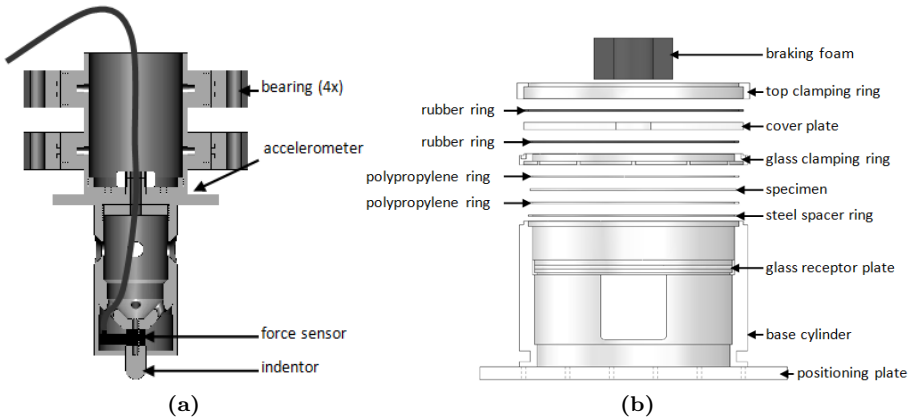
Assembly drawings for drop weight test setup components: (a) impactor, and (b) base support (figures from De Pauw [5]).
